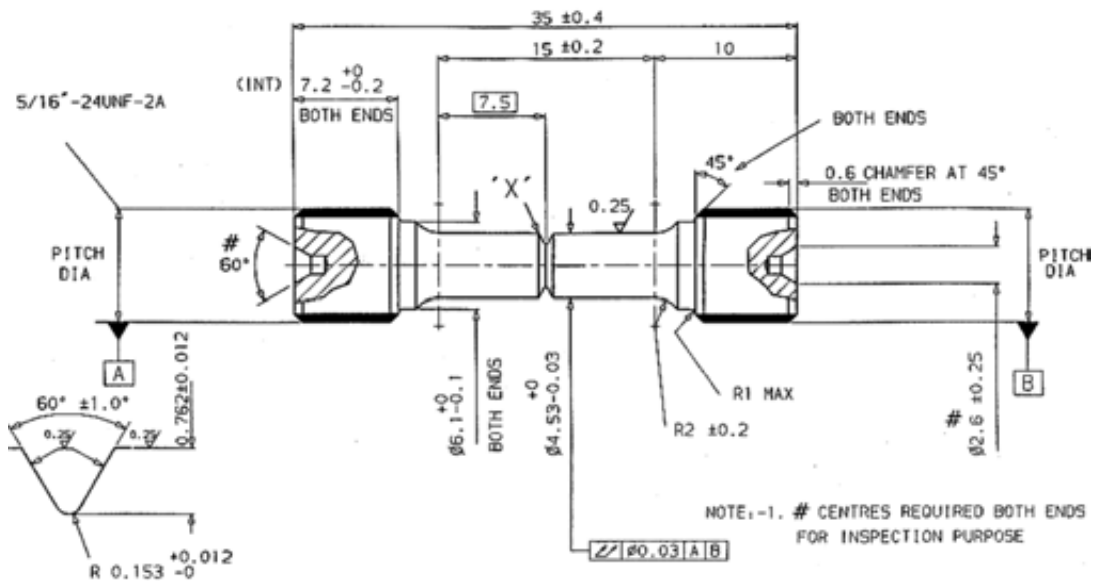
Diagram showing the geometry of notched tensile test pieces with $K_t=3.1$ and the notched cross section area to be 7mm^2 .
